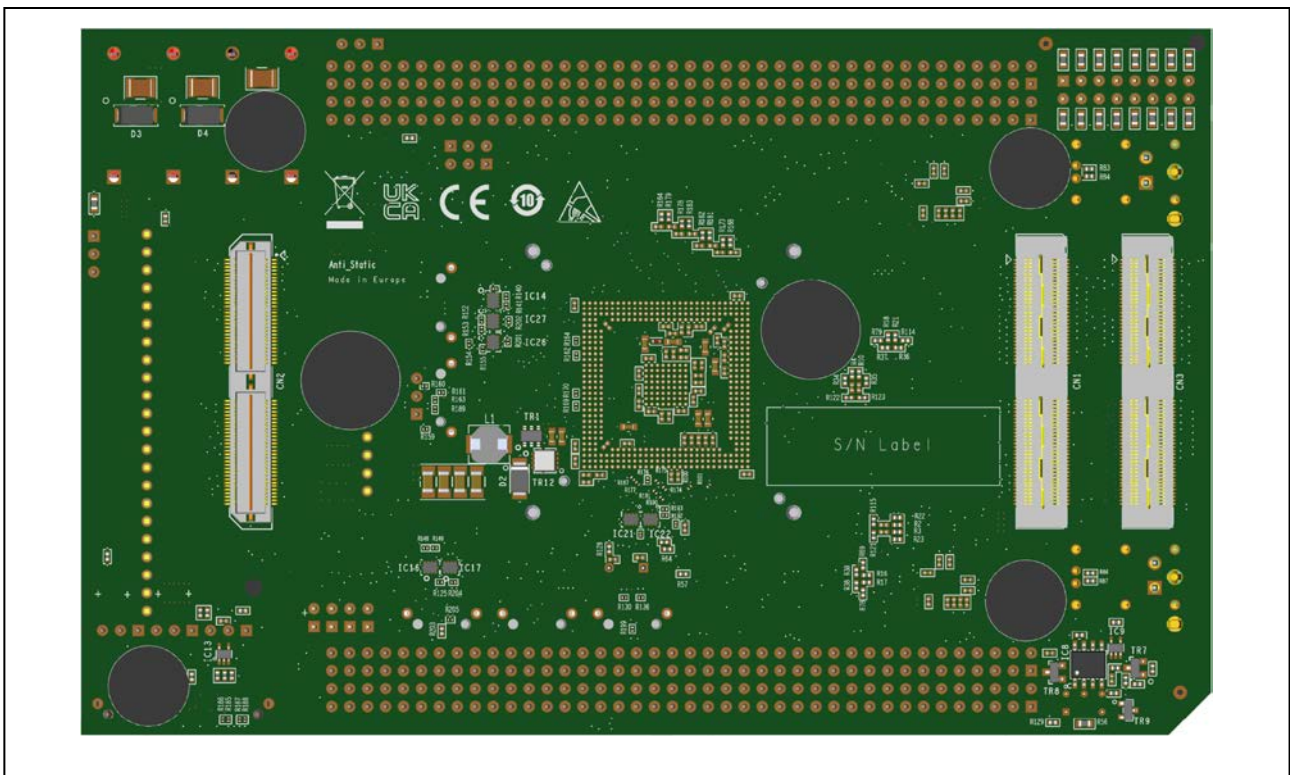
D018177_06_V03 Piggyback board bottom view
